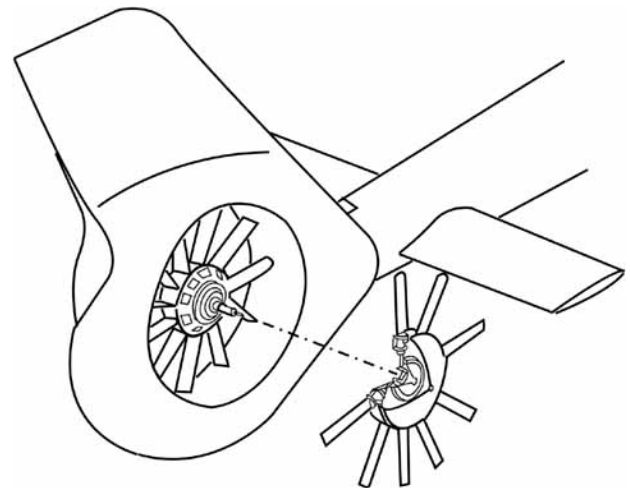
Counter-torque device with ducted tail rotor and ducted flow-straightening stator, for helicopter.
